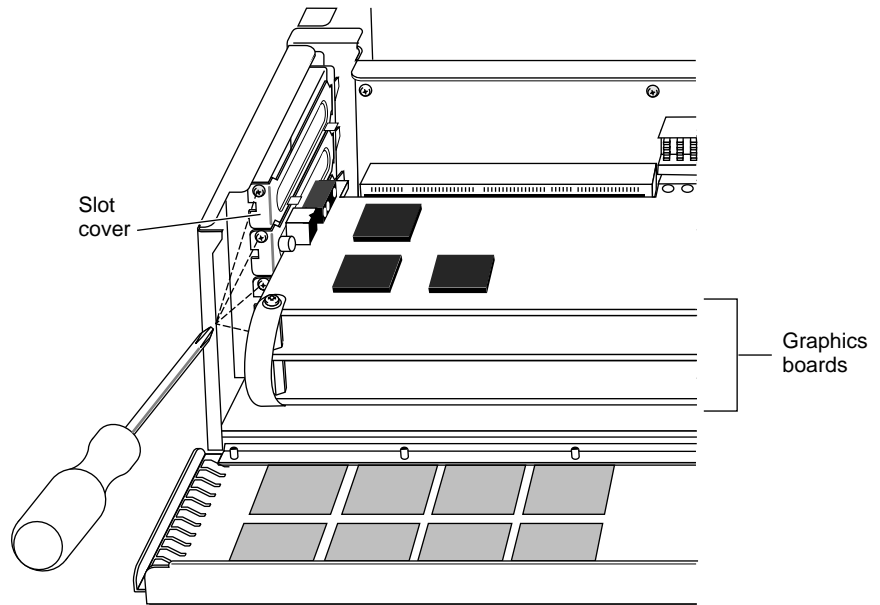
Attaching the Graphics Board Set to the Chassis
